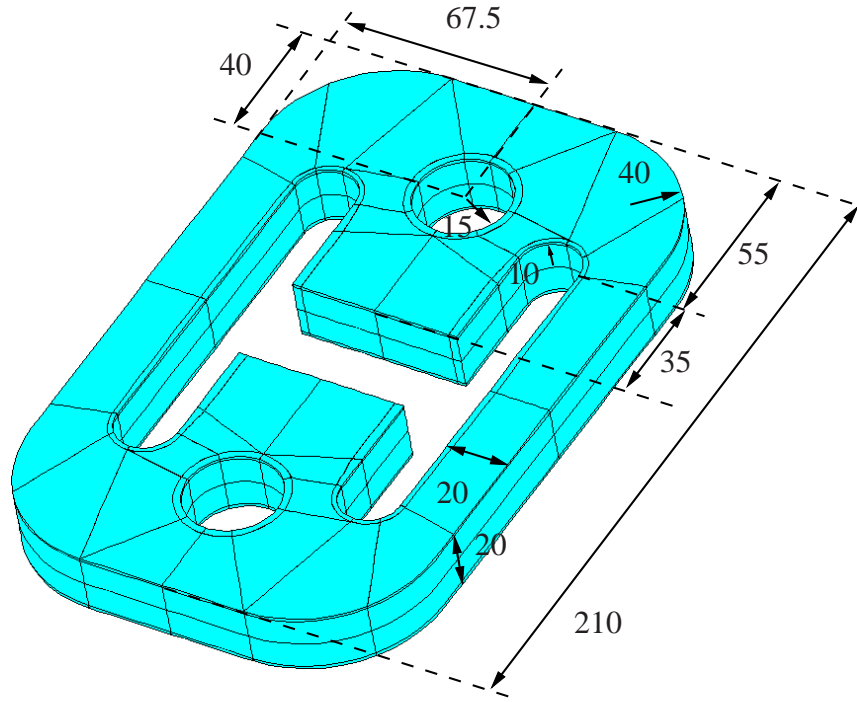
Geometry and dimensioning of exhaust pipe mounting bracket
